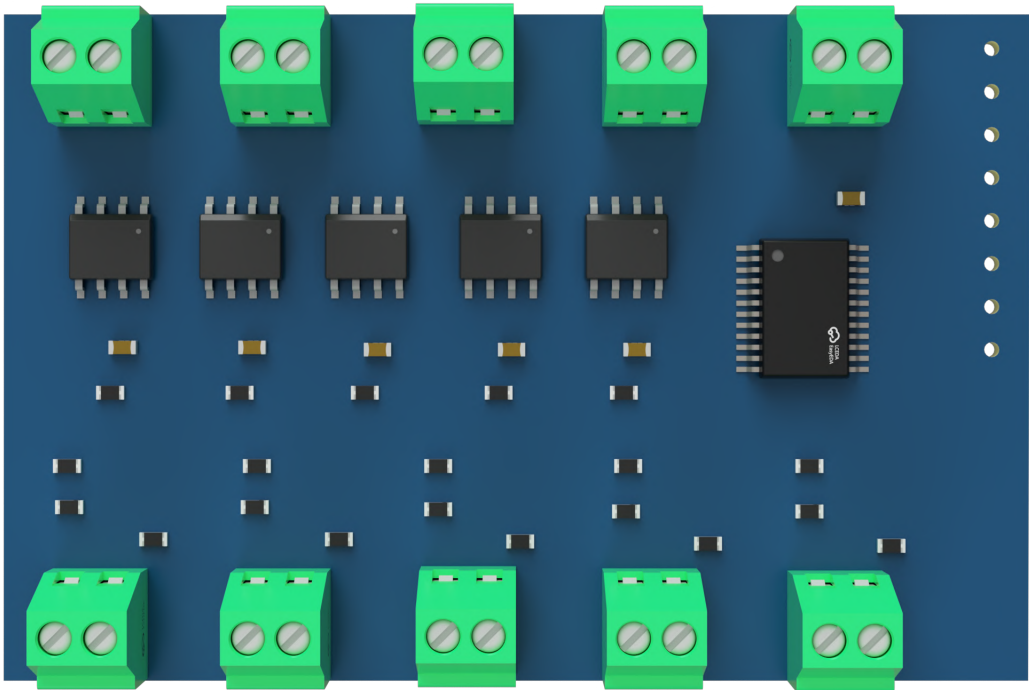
Power Monitoring Board PCB Layout for Duburi 4.5
